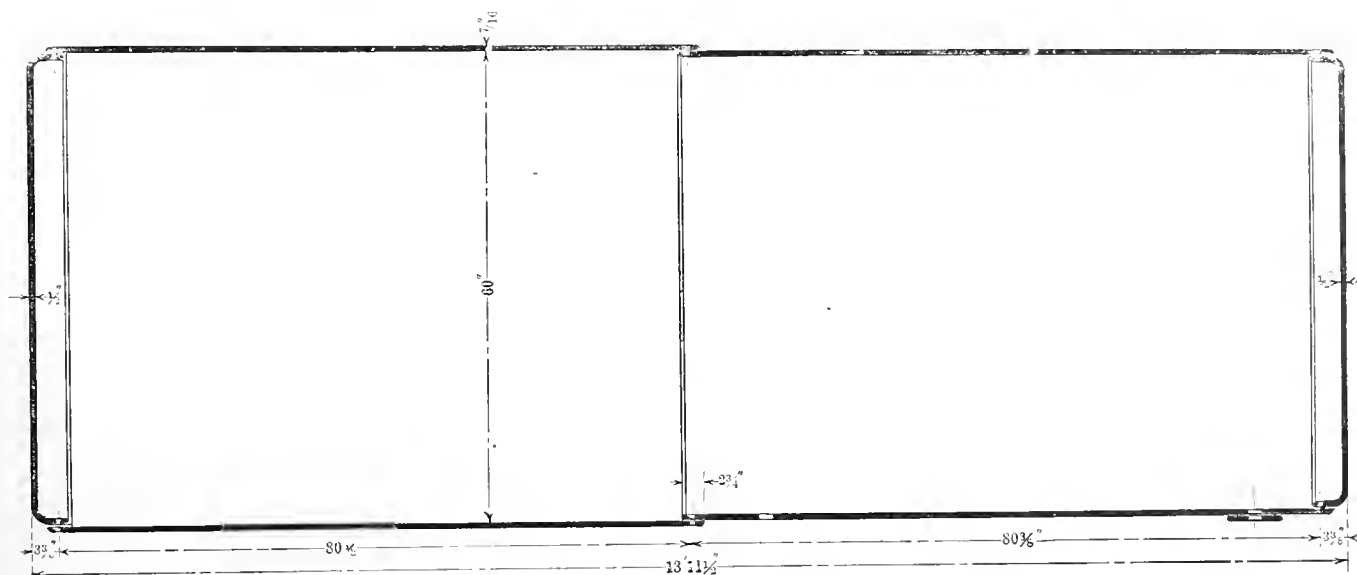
SECTION SHOWING OUTLINE OF BOILER SHELL AND HEADS.
